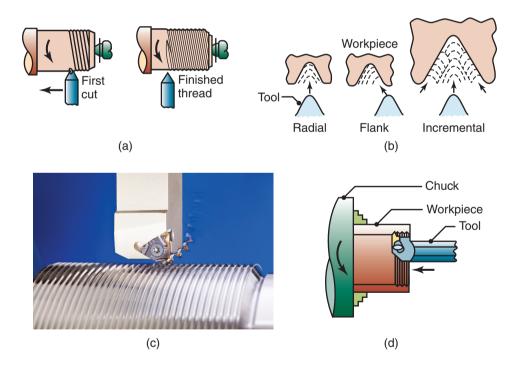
(a) Cutting screw threads on a lathe with a single-point cutting tool. (b) Cutting screw threads with a single-point tool in several passes, normally utilized for large threads. The small arrows in the figures show the direction of feed, and the broken lines show the position of the cutting tool as time progresses. In *radial cutting*, the tool is fed directly into the workpiece. In *flank cutting*, the tool is fed into the piece along the right face of the thread. In *incremental cutting*, the tool is fed first directly into the piece at the center of the thread, then at its sides, and finally into the root. (c) A typical coated-carbide insert in the process of cutting screw threads on a round shaft. (d) Cutting internal screw threads with a carbide insert. *Source:* (c) Courtesy of Iscar Metals, Inc.
